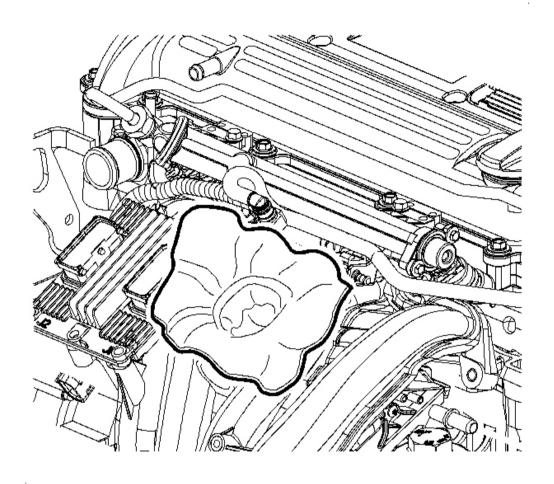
View Of Intake Manifold Opening With A Clean Shop Towel Courtesy of GENERAL MOTORS CORP.
